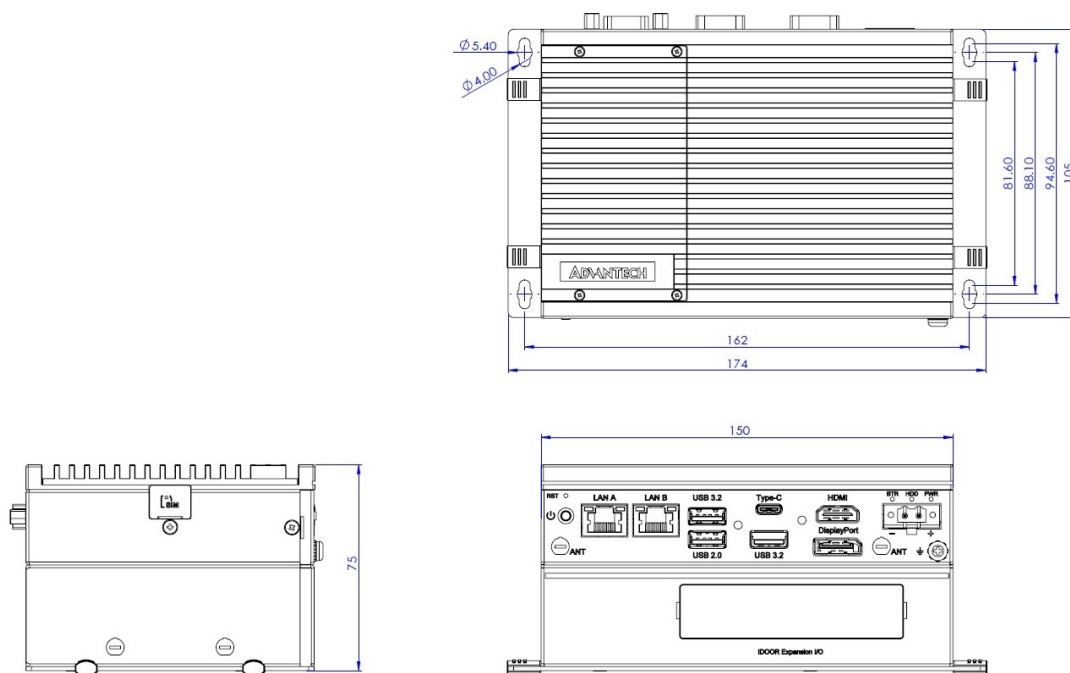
UNO-2372V3 Dimensions (with Optional Extension Kit)
